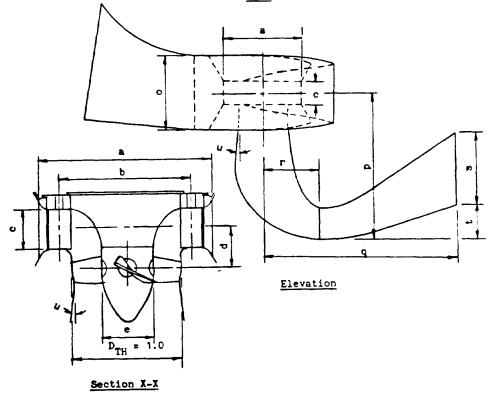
PROPELLER TYPE TURBINES - DIMENSIONS
